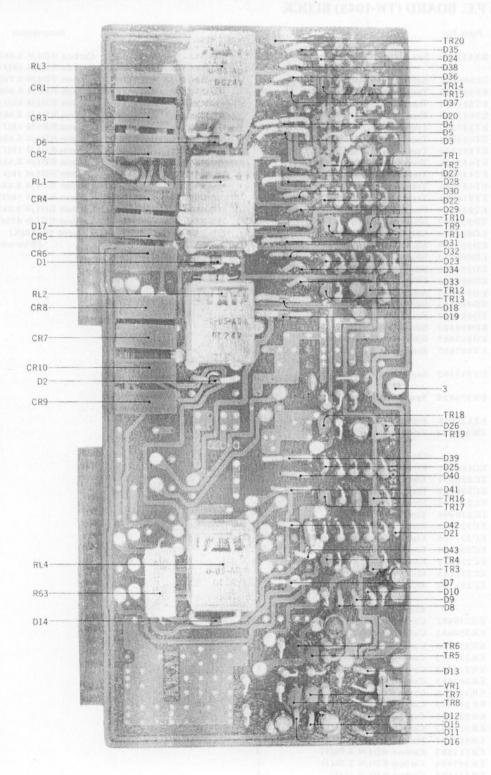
PHOTO OF SYS. CON. P.C. BOARD (TW-1048)
